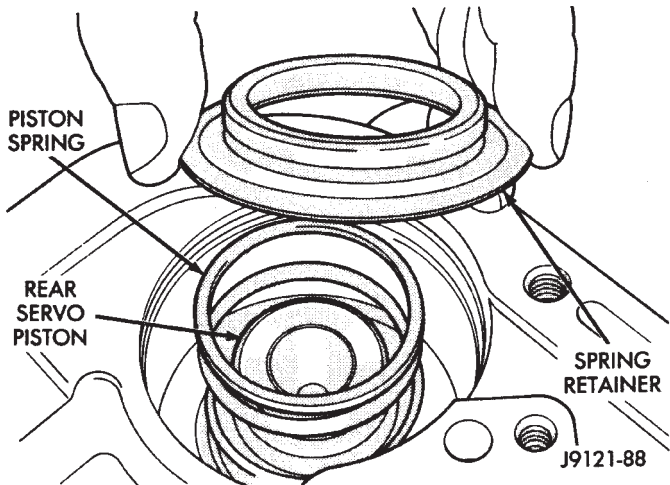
Installing Rear Servo Piston Spring And Retainer—46RH
